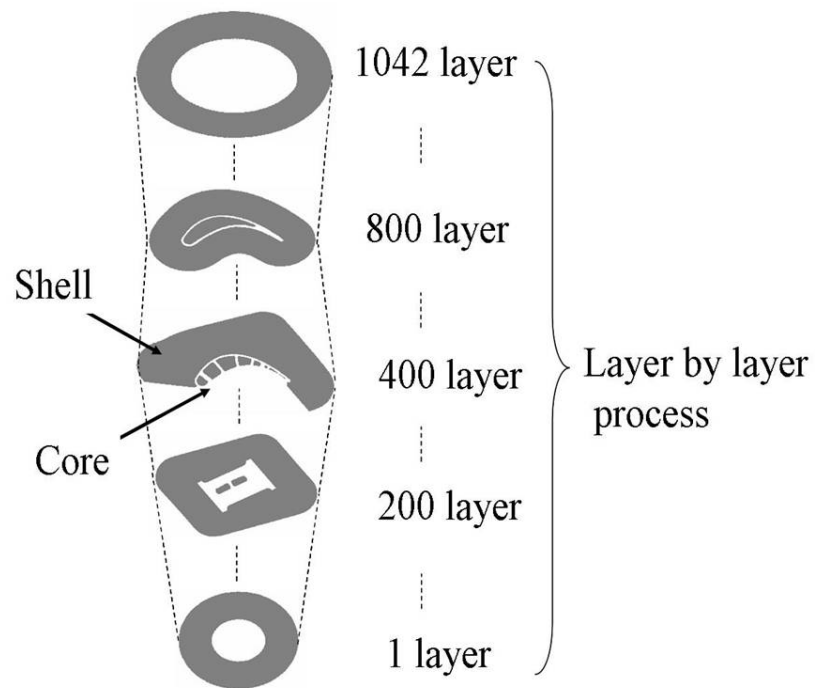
7 Integrally cored ceramic mold (ICCM) has been built using layer by layer process, which has 1042 layers with the thickness of 100 μm . Core and shell parts are shown between 200 layer and 800 layer.
